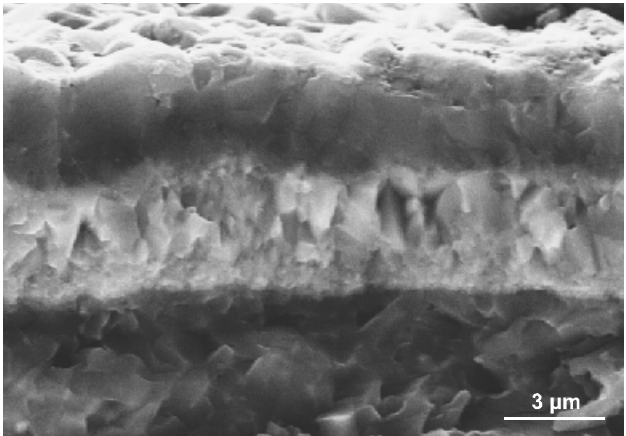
Fracture surface of the Ti(C,N)+Al₂O₃+TiN multilayer CVD coating deposited onto sialon ceramics
